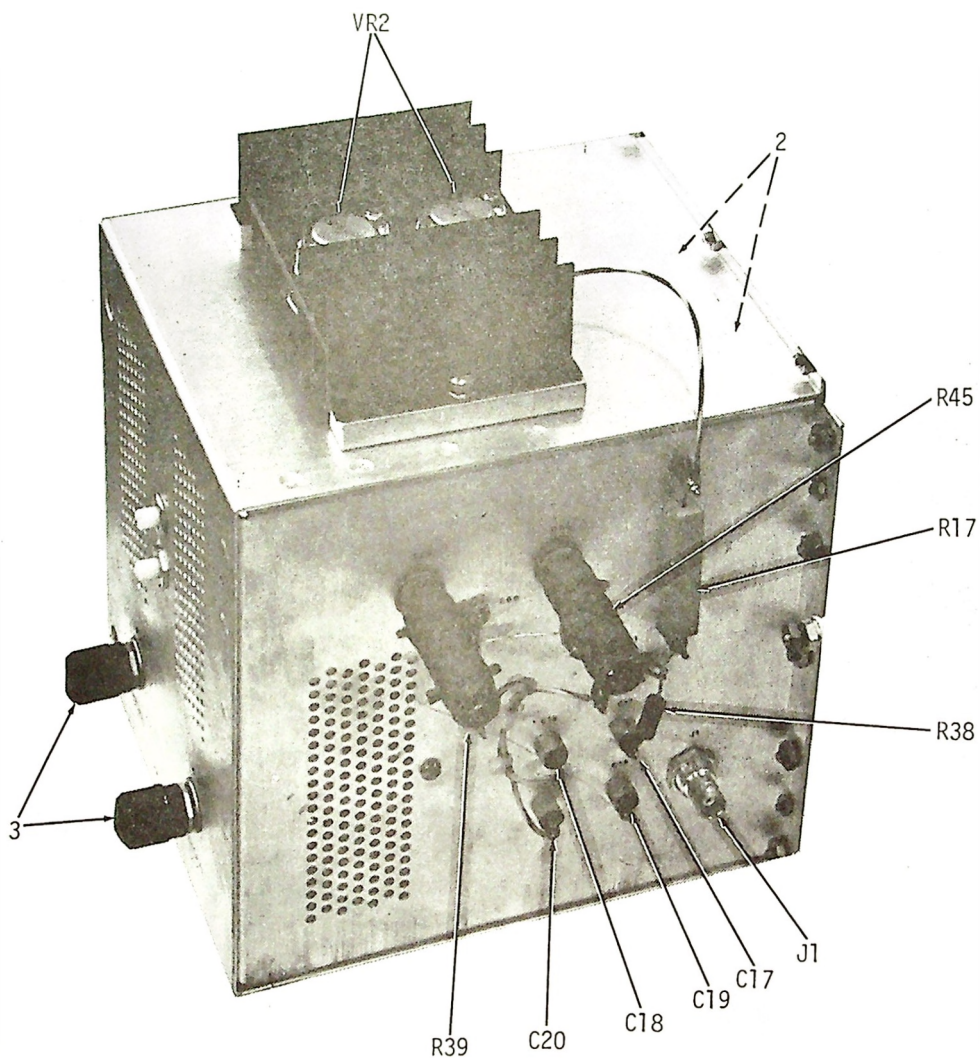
RF Driver Assembly, A11 (Sheet 1 of 2).
